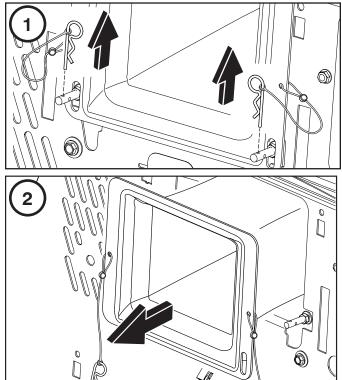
TO REMOVE MOWER (See Fig. 2)
